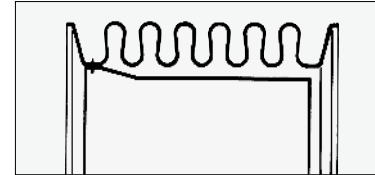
Exhaust expansion joint with one-piece inner sleeve
